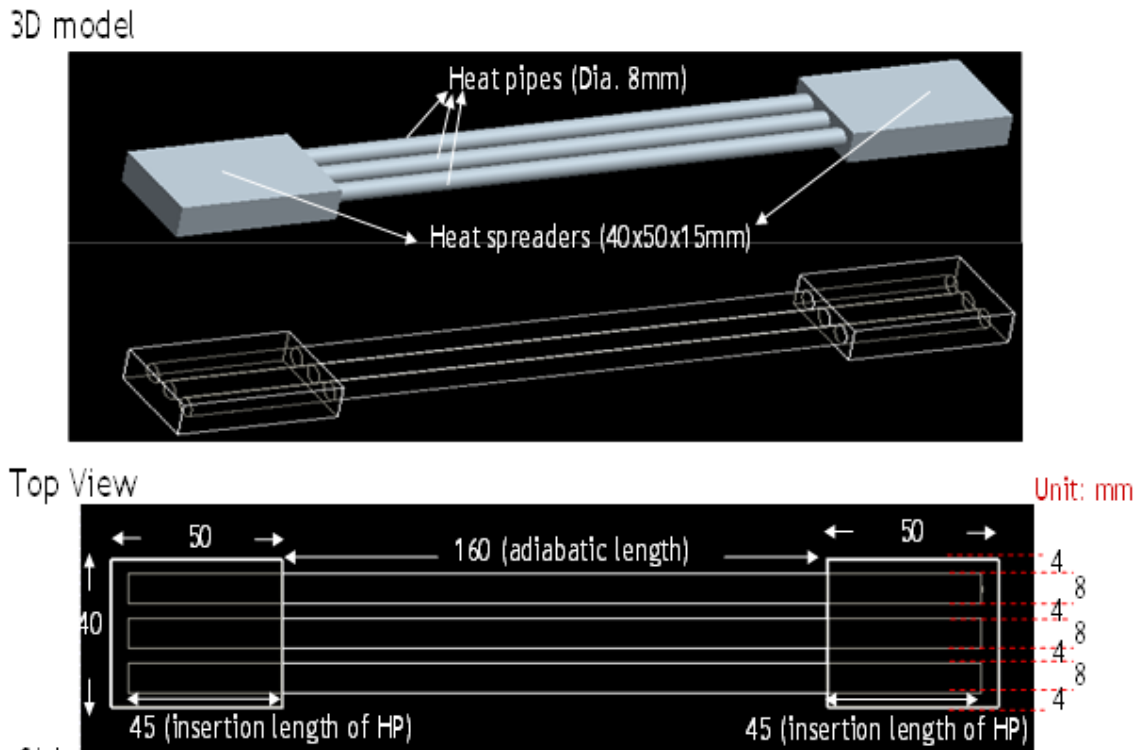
Engineering drawings of a 250-mm prototype thermal module fabricated by Vendor 3. The module consists of three 8-mm-diameter heat pipes and copper heat-spreader blocks.
